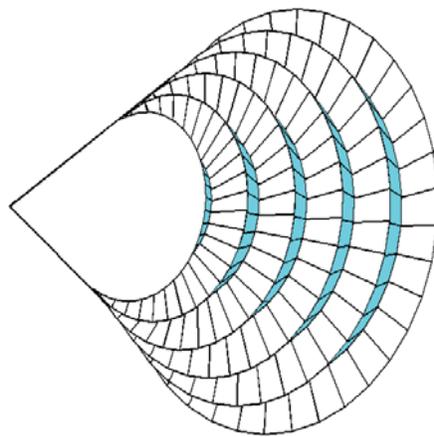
Conic thread perpendicular lines, λ_2 , replaced with v-shaped thread profiles
